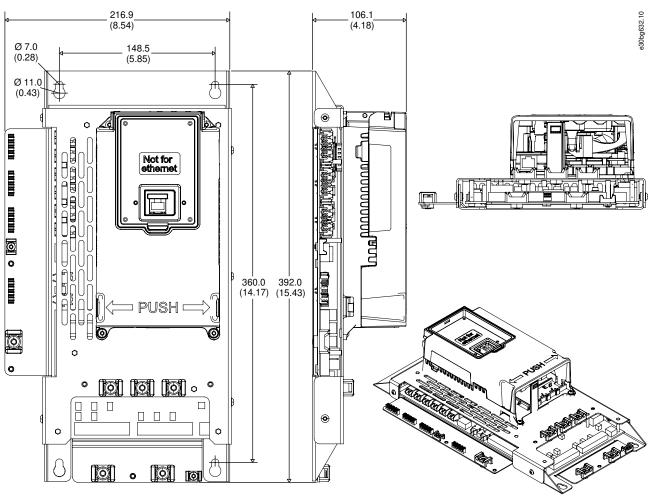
VACON® 3000 Control Unit Dimensions in mm (in)
